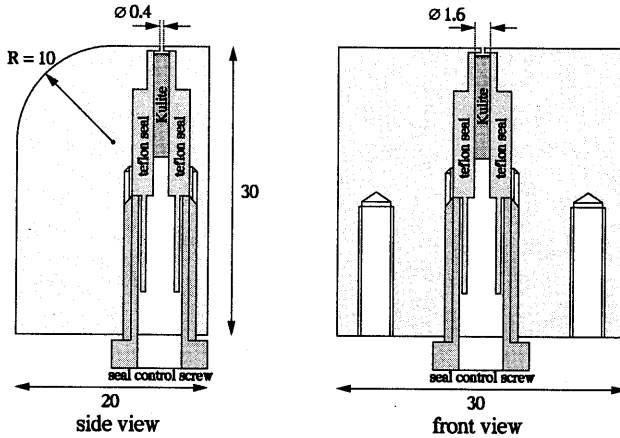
Mounting of the Kulite pressure transducer in one of the brass blocks that form the constriction. A seal made of Teflon controlled by a screw is used to ensure a tight fit.
